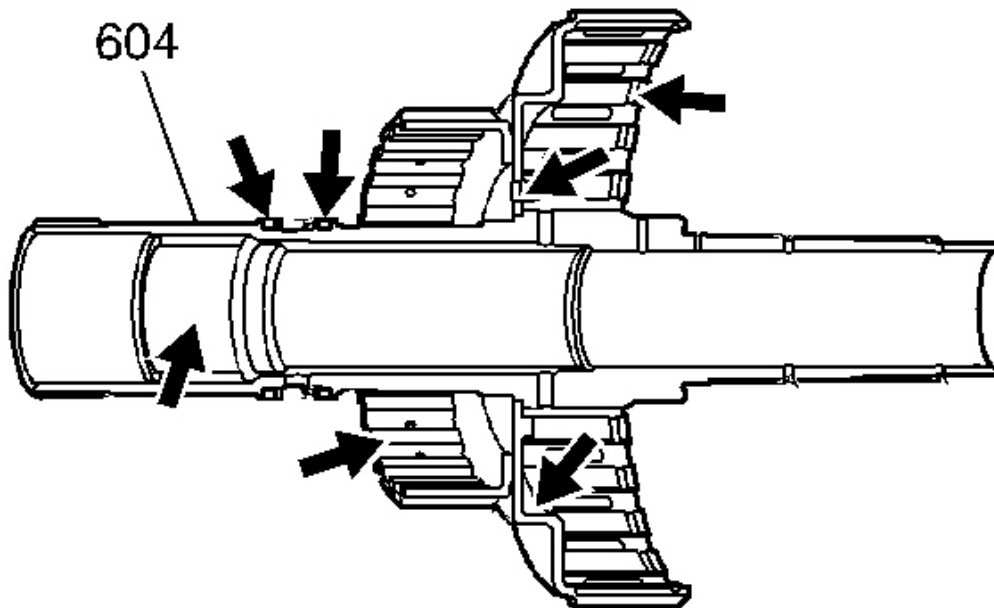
Identifying 3rd Clutch Housing Inspection Points
